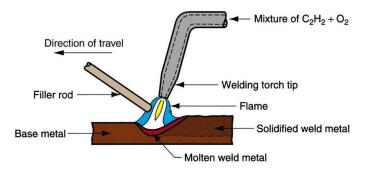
A typical oxyacetylene-gas welding process.
